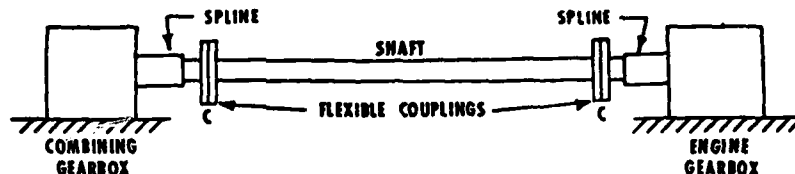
SCHEMATIC OF CHINOOK CROSS SHAFT ASSEMBLY
